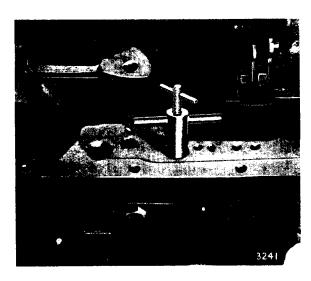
Removing the rear pump outlet tube (Extractor Tool Part No. CWG45)
